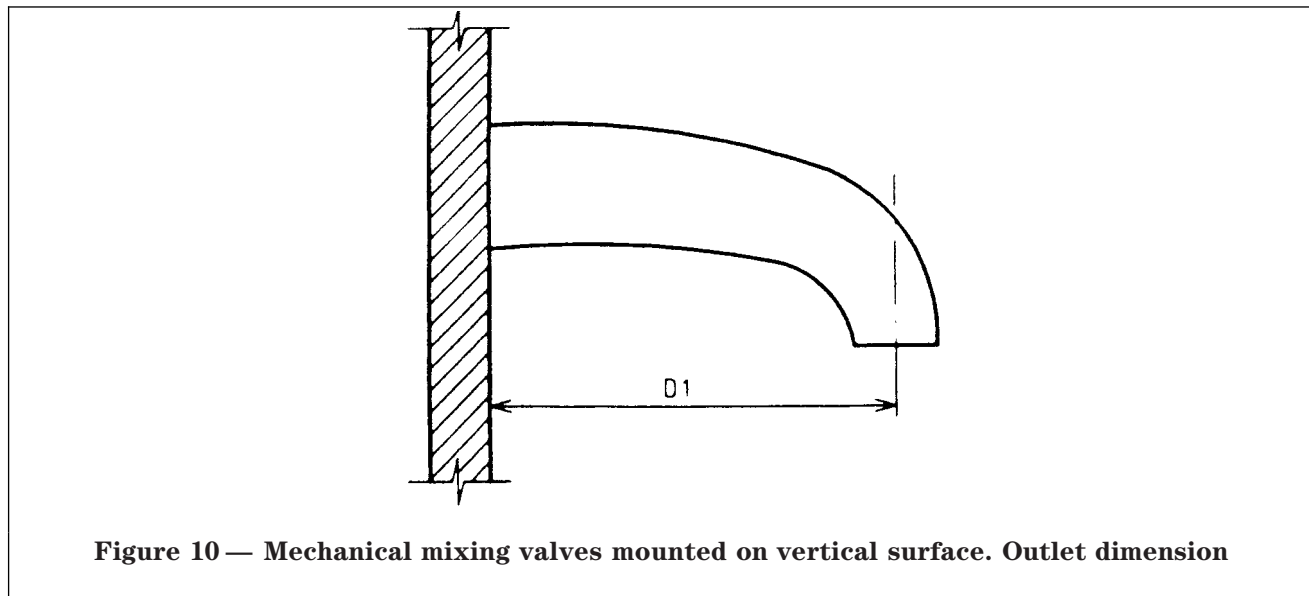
Mechanical mixing valves mounted on vertical surface. Outlet dimension
